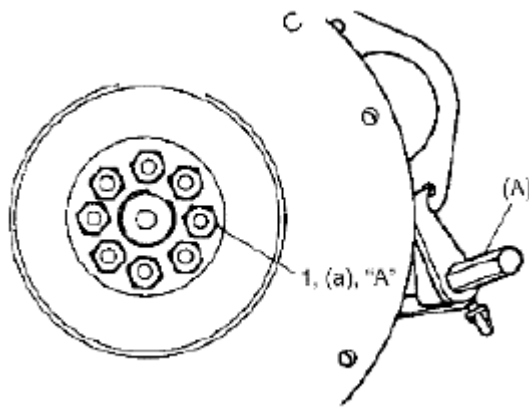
Identifying Flywheel Or Drive Plate Bolts
